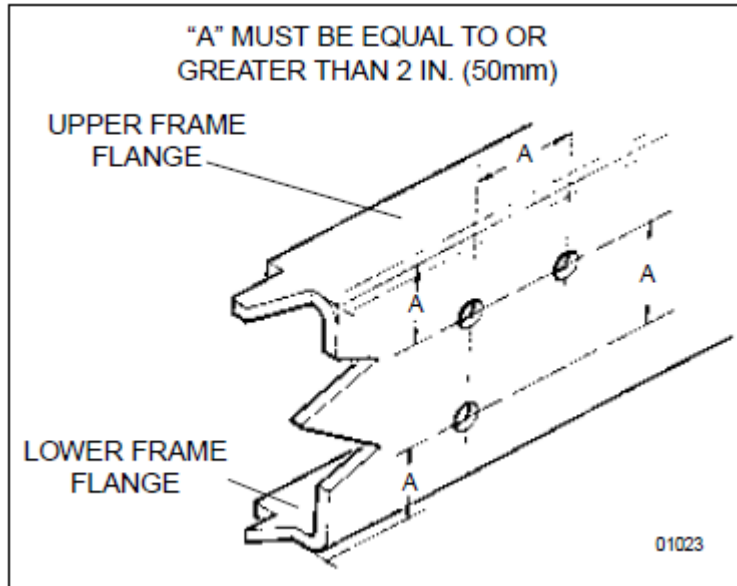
Frame Hole Location Guidelines for Frame Rail and Bracket
